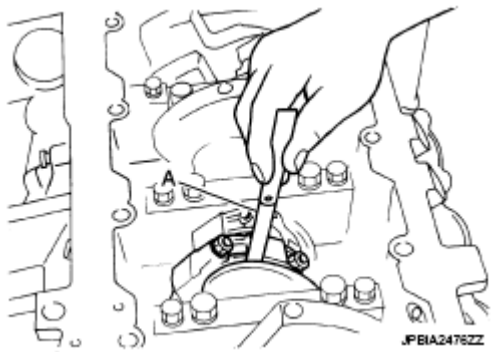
Measuring Side Clearance Between Connecting Rod And Crankshaft Arm
